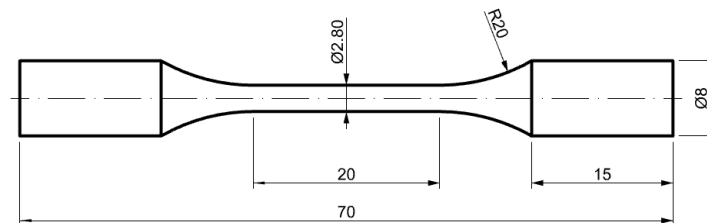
Dimensions of the BC specimen type, adapted from ASTM E606/606M standard.
